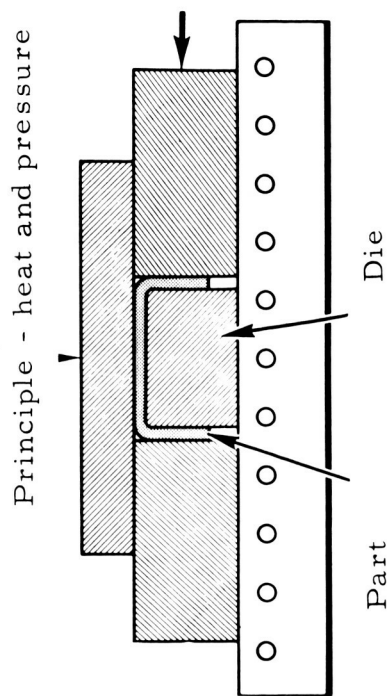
HOT-SIZING PRESS (REF. 109)
